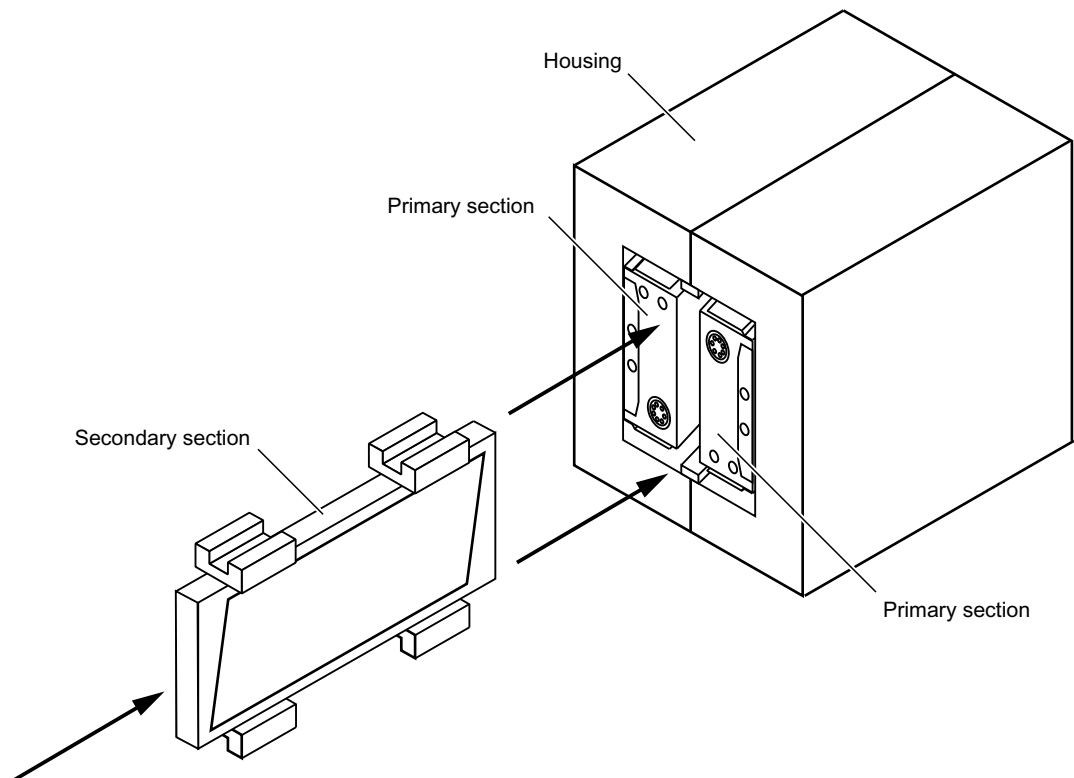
Inserting the secondary section for a double-sided motor (similar diagram)
